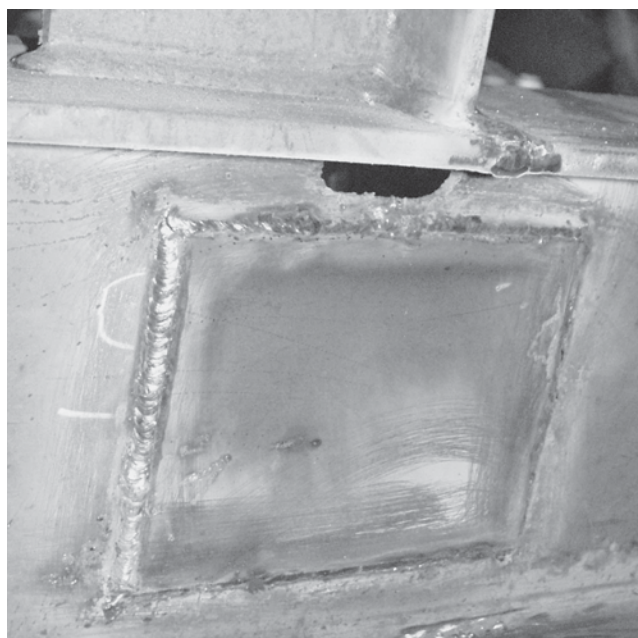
Welded doubler plate detail. (Note that corners should be rounded.)
